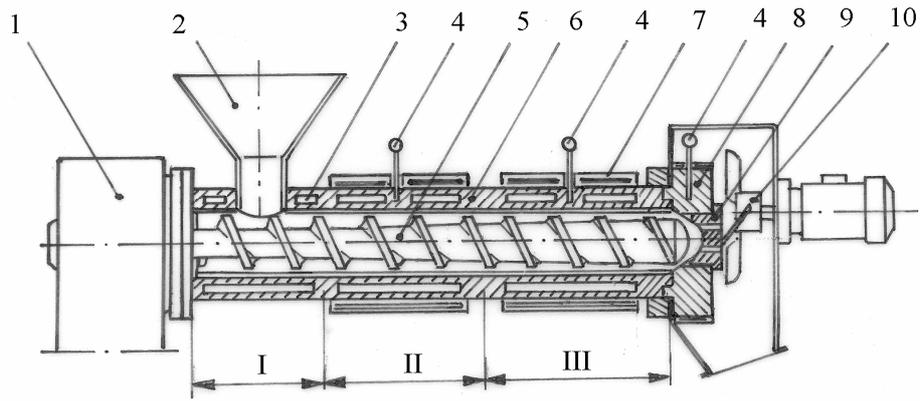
A cross-section of a single-screw extrusion-cooker (1 - engine, 2 - feeder, 3 - cooling jacket, 4 - thermocouple, 5 – screw, 6 - barrel, 7 - heating jacket, 8 - head, 9 - net, 10 - cutter, I - transport section, II – compression section, III –melting and plasticization section (Mościcki et al., 2009).
